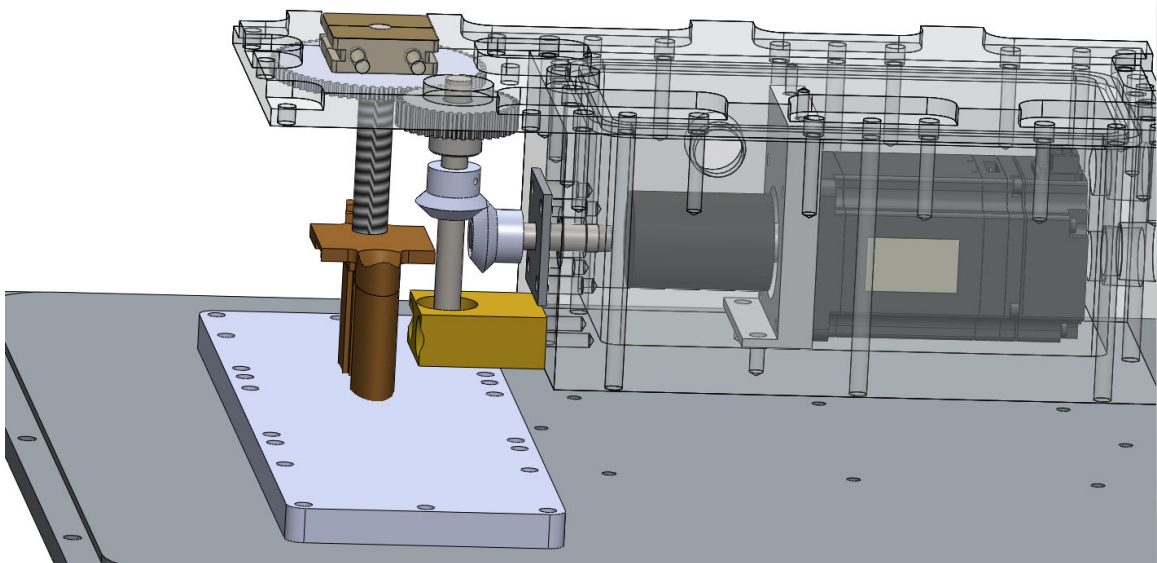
The traverse mechanism shown in detail. Note the flexible shaft coupling inside the enclosure and the shaft exiting the enclosure through three seals, which are not shown in this drawing.
